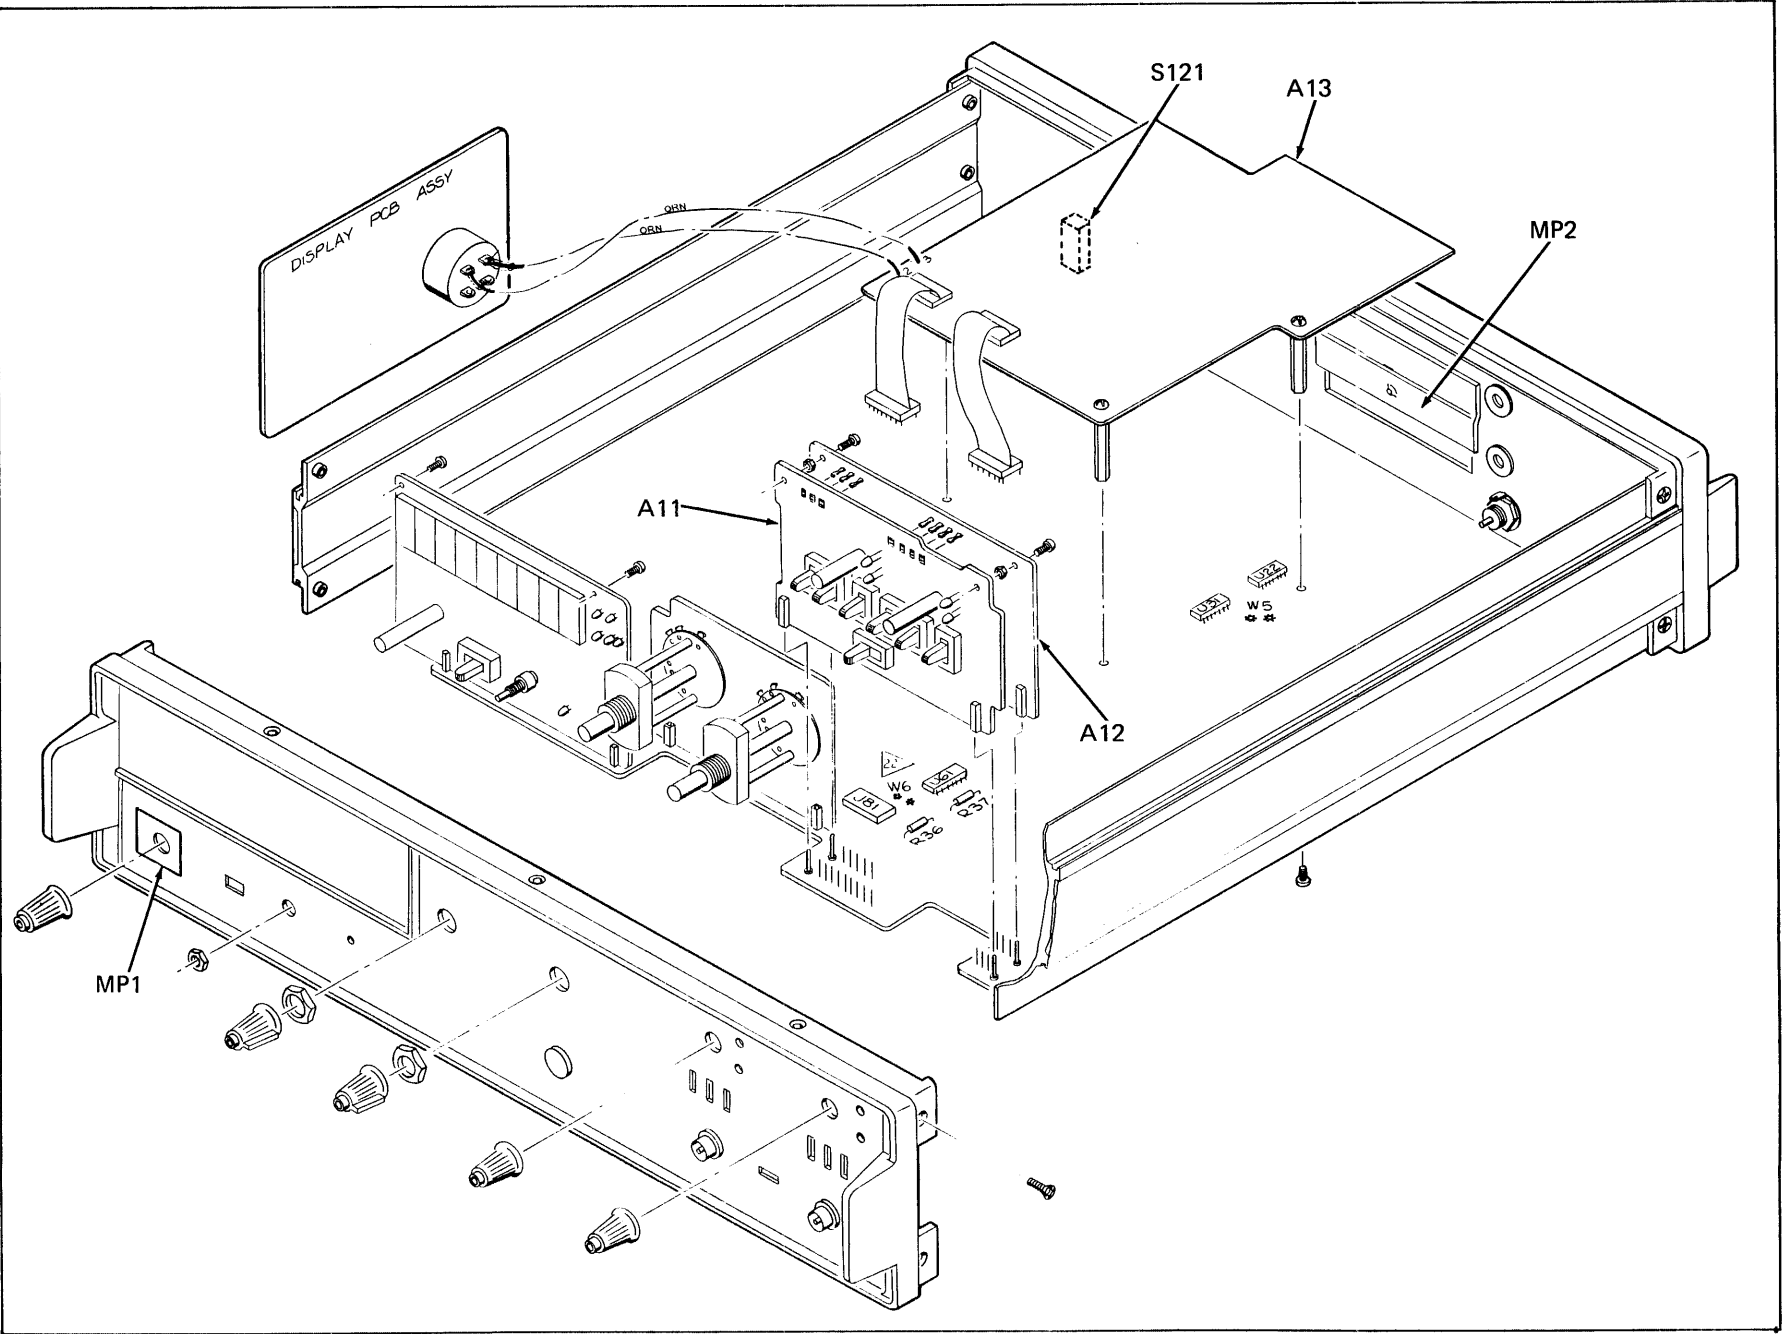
12 Option, Full Remote Control Unit Assembly
